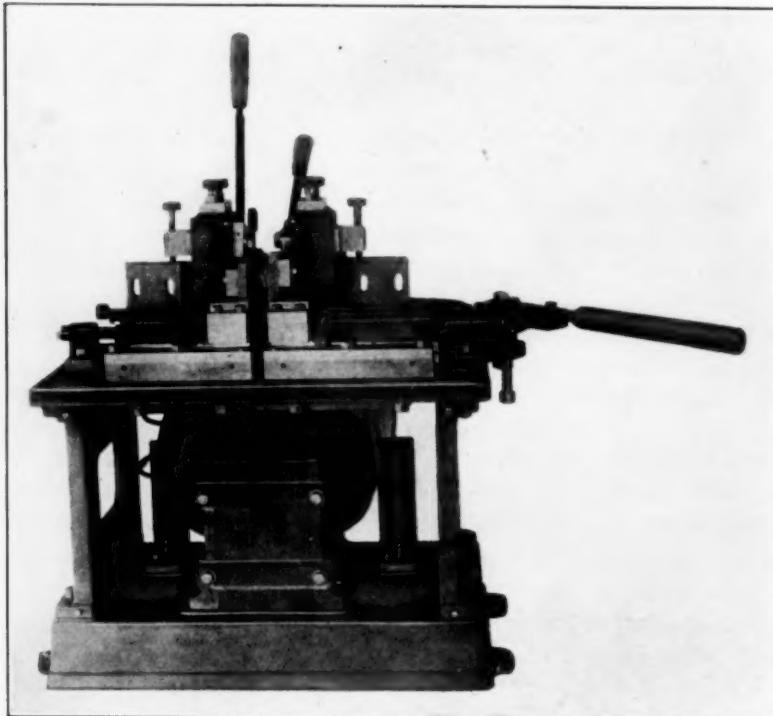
THOMSON SEMI-AUTOMATIC ELECTRIC WELDER FOR WIRE
